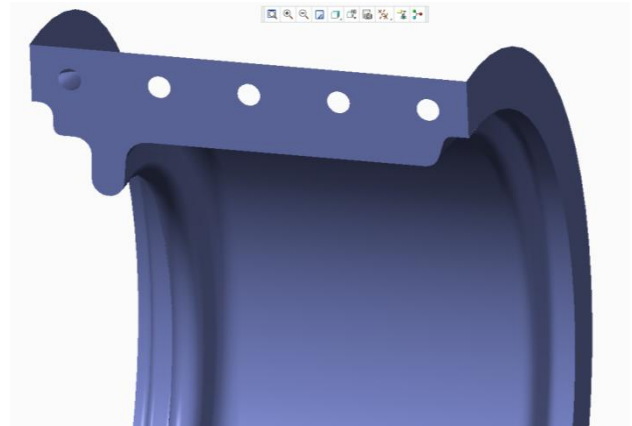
Draft Close-up Showing an Endplate of a Single Rim Mold
